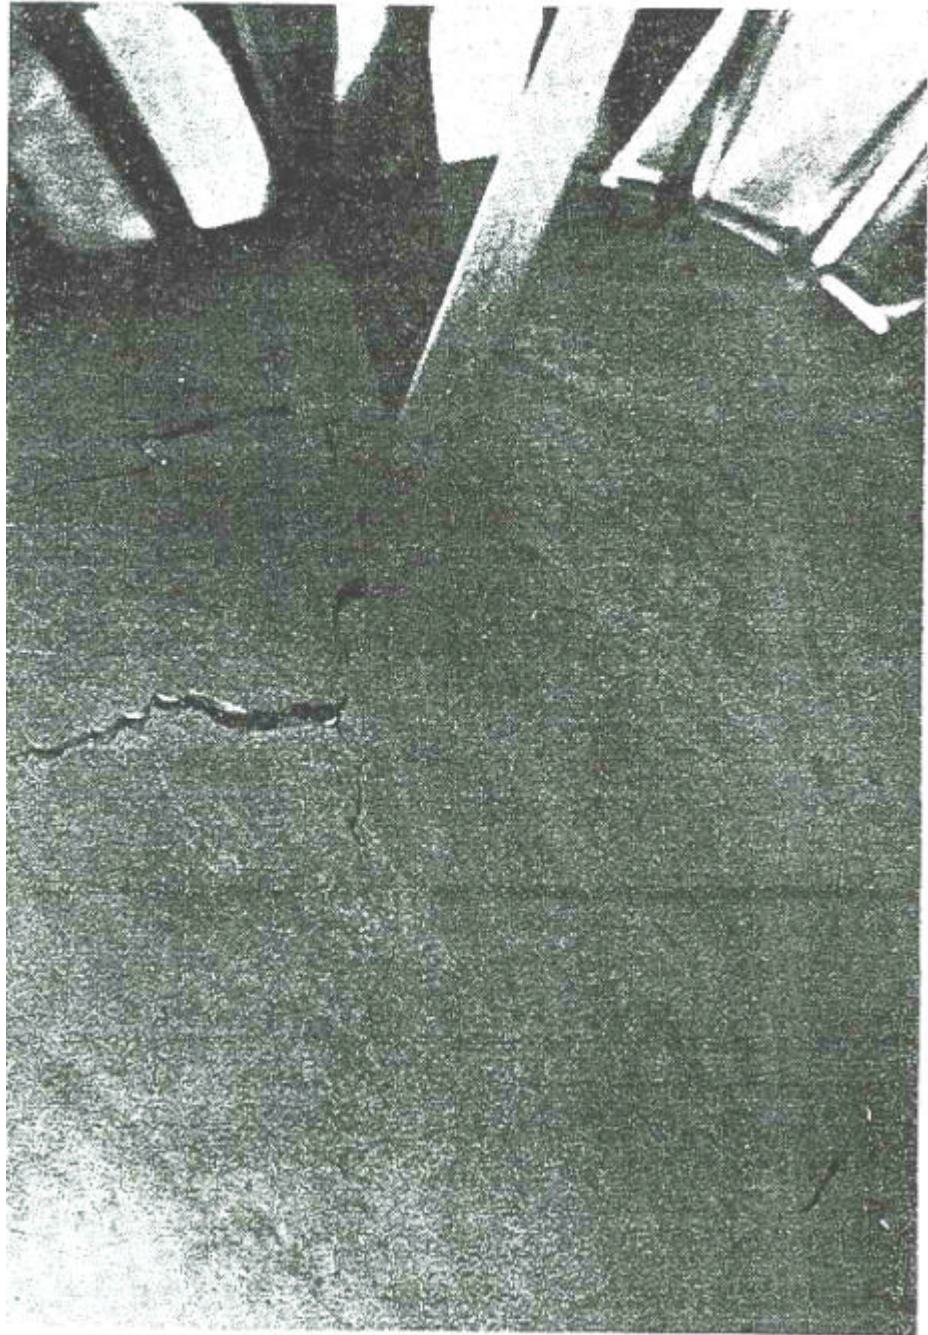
Fatigue cracks near main spokes in diffuser of Magnox gas circulator
